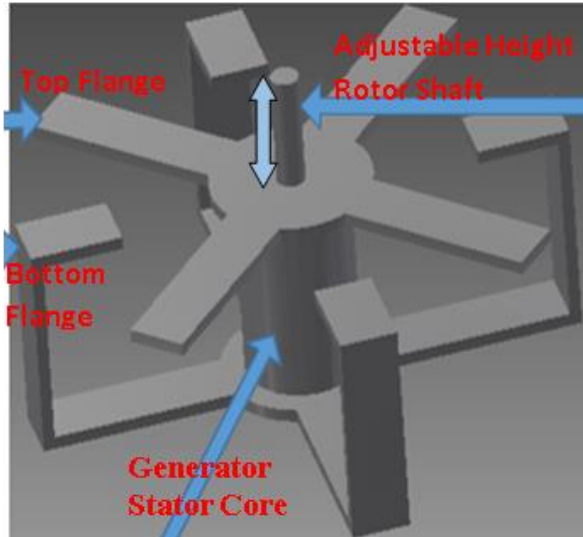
Three-quarter view of the proposed generator design showing the core sections: flanges – top & bottom, core and adjustable shaft for the rotor
